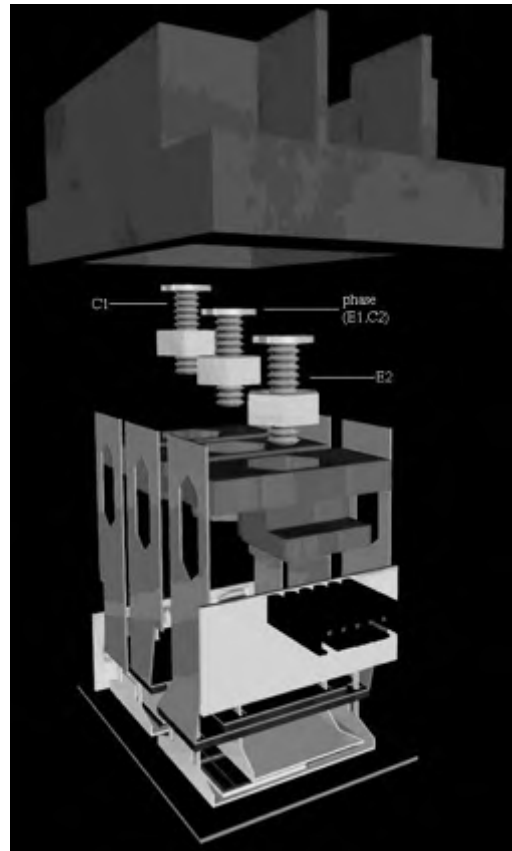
Advanced module cut-away showing contacts without using wirebonds.
